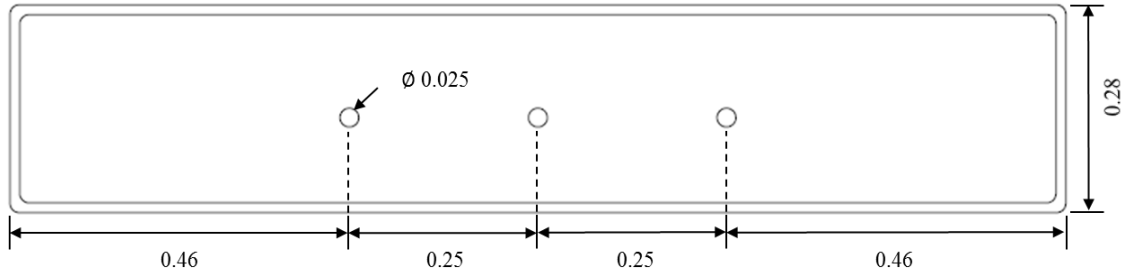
Dimensions of inserting plate with injection holes. All dimensions are in meters.
